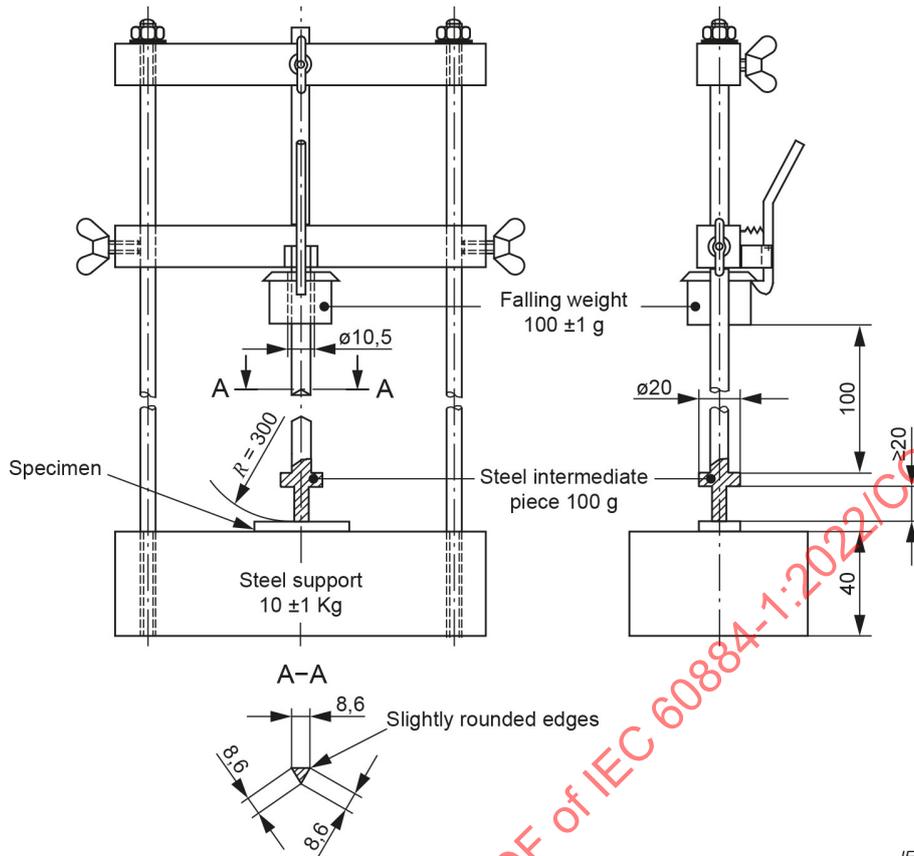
Impact test apparatus on pins provided with insulating sleeves
